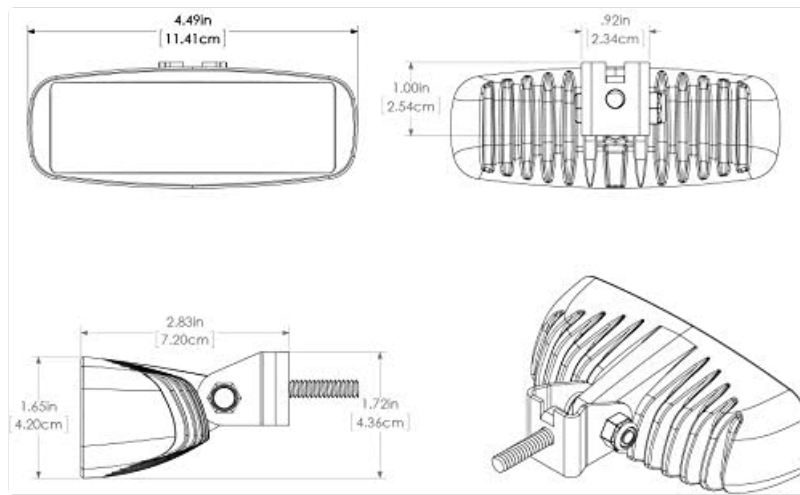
Detailed dimensional drawing of the Lumitec Caprera light, showing key measurements in inches and centimeters.
